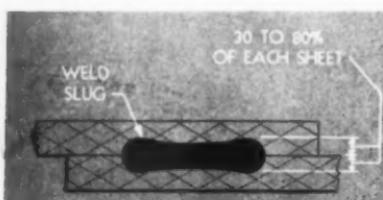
Cross section of a good spot weld in magnesium.
